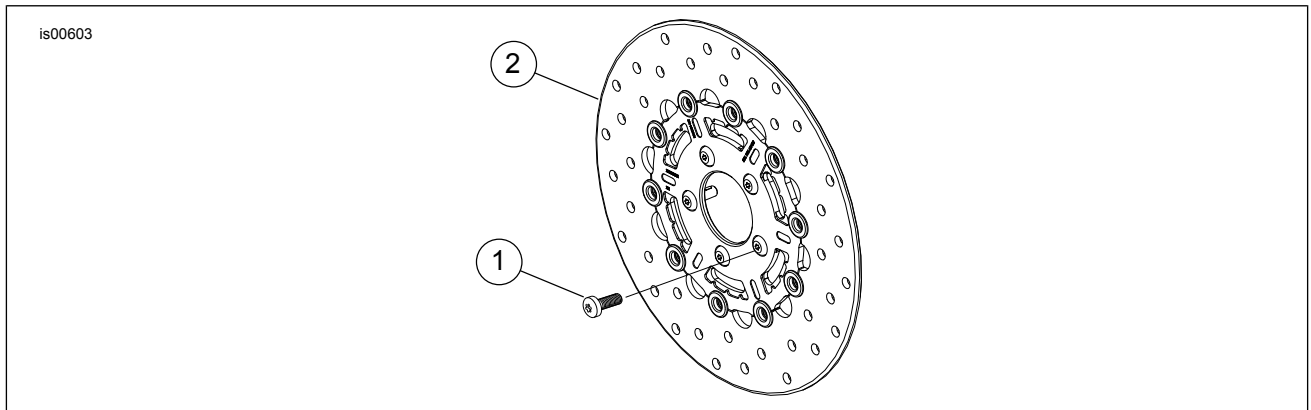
Service Parts: Six Spoke Front and Rear Floating Rotor Kits
